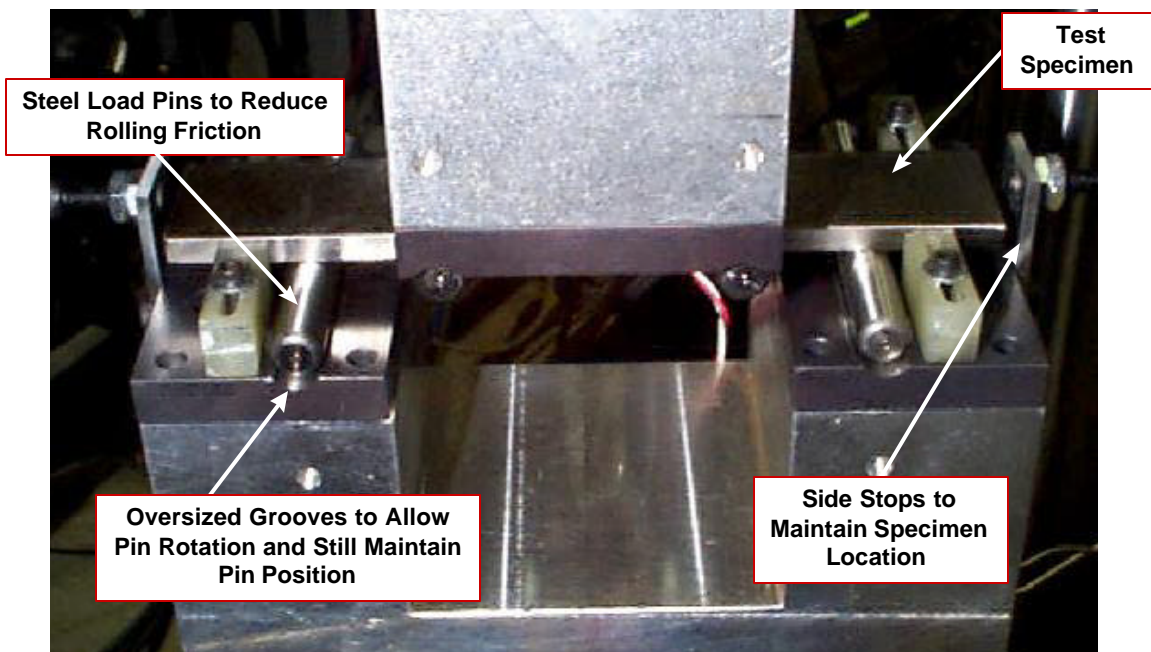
C.12. Test Fixture for the FOD Specimen. Notice, Portions of the Fixturing which Enable Reverse Loading have been Removed to Expose the Loading Pins and Specimen.
